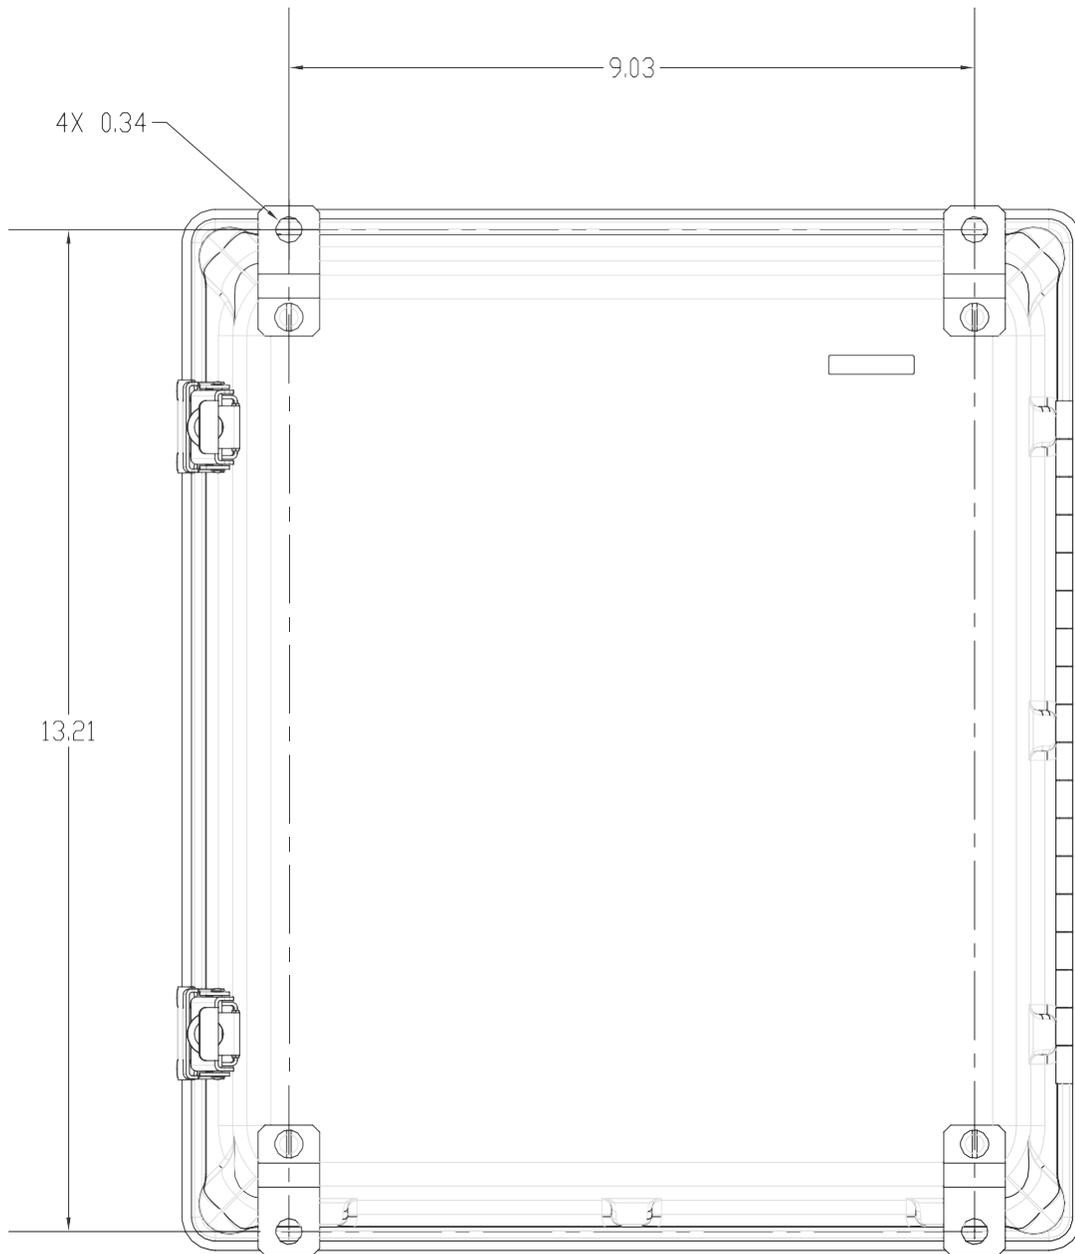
NEMA 4X Enclosure Mounting Dimensions
